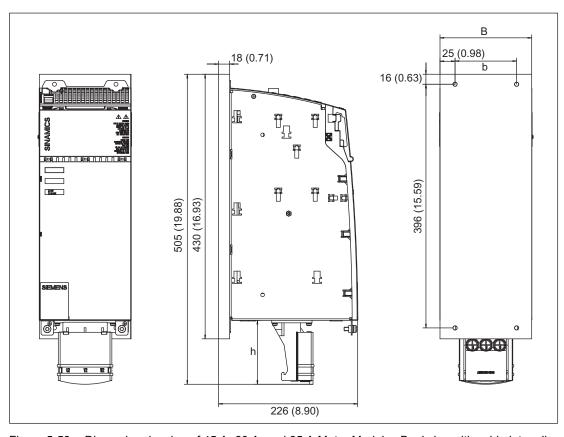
Dimension drawing of 45 A, 60 A, and 85 A Motor Modules Booksize with cold plate, all dimensions in mm and (inches)
